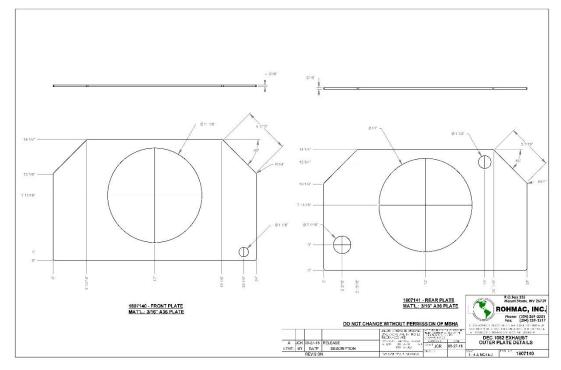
Revised Diesel Power Package Exhaust Cooler Plate Detail Drawing
